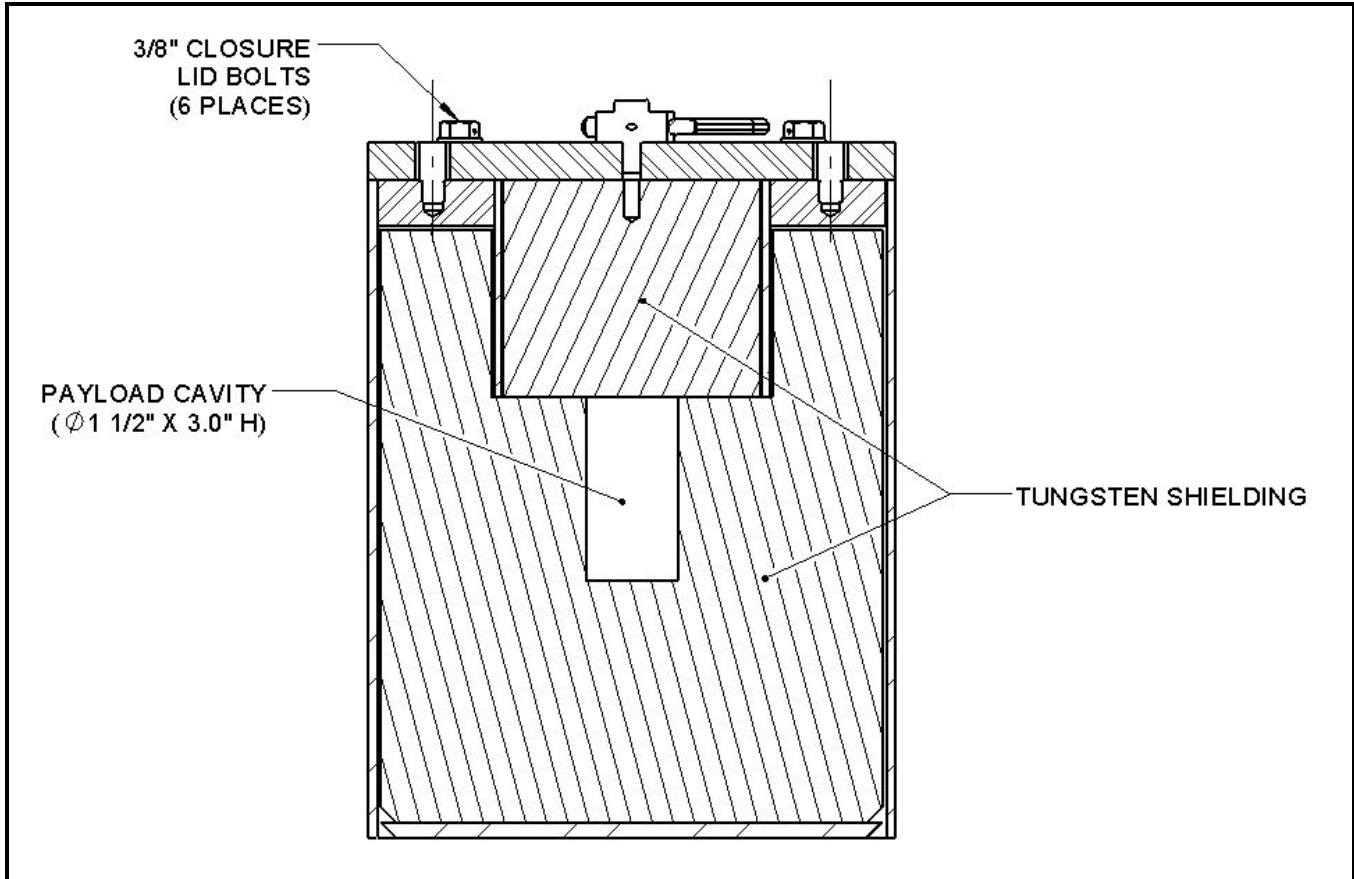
INC RMSC Payload – Cross-Sectional View
